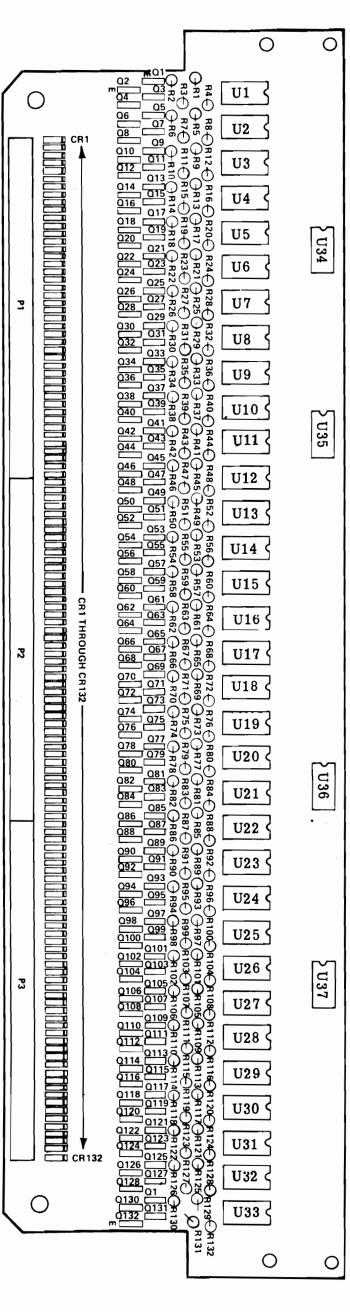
Hammer Driver Assembly 02607-60005 Parts Location Diagram (Series 1415, 1417)
